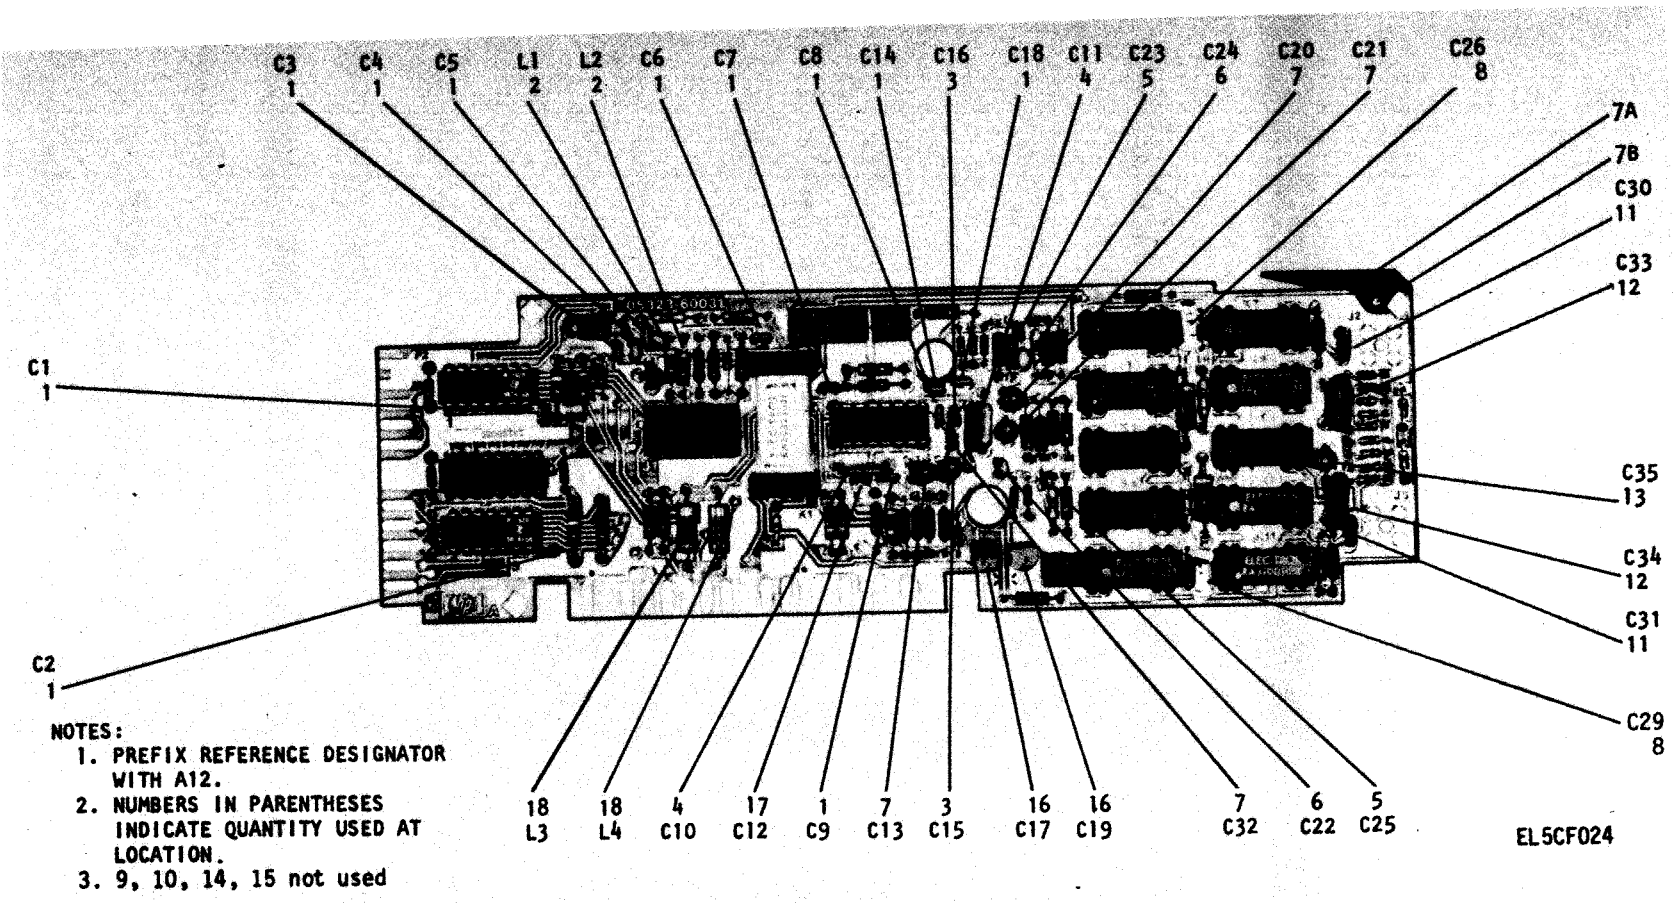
A8 Circuit Card Assembly (Sheet 5 of 5).
